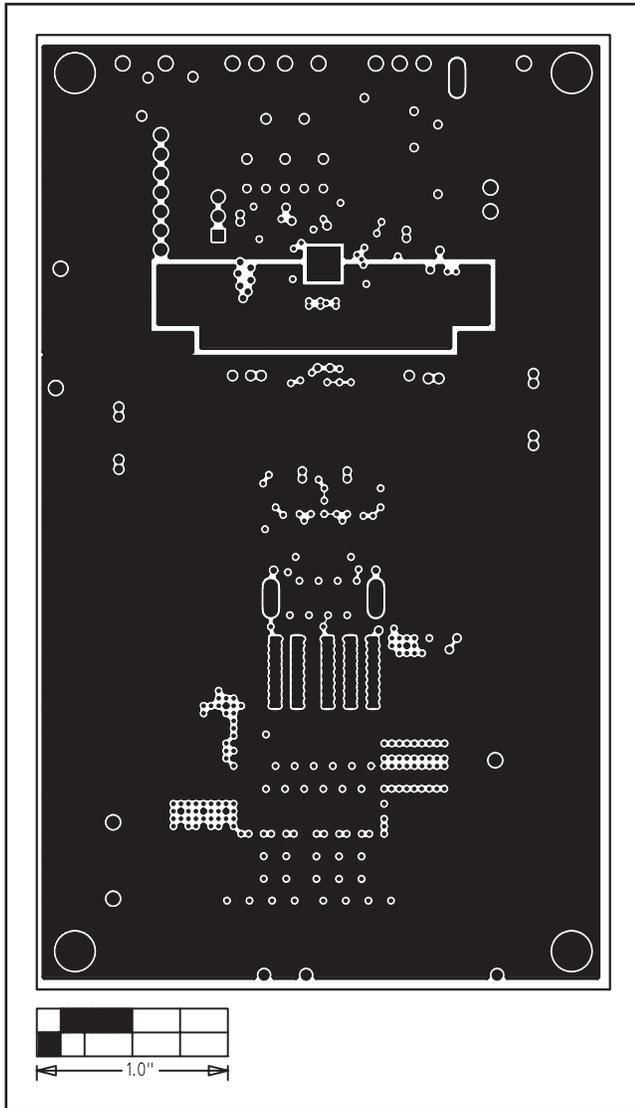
MAX17582 EV Kit PCB Layout—Internal Layer 2 (VBATT/PGND Plane)
